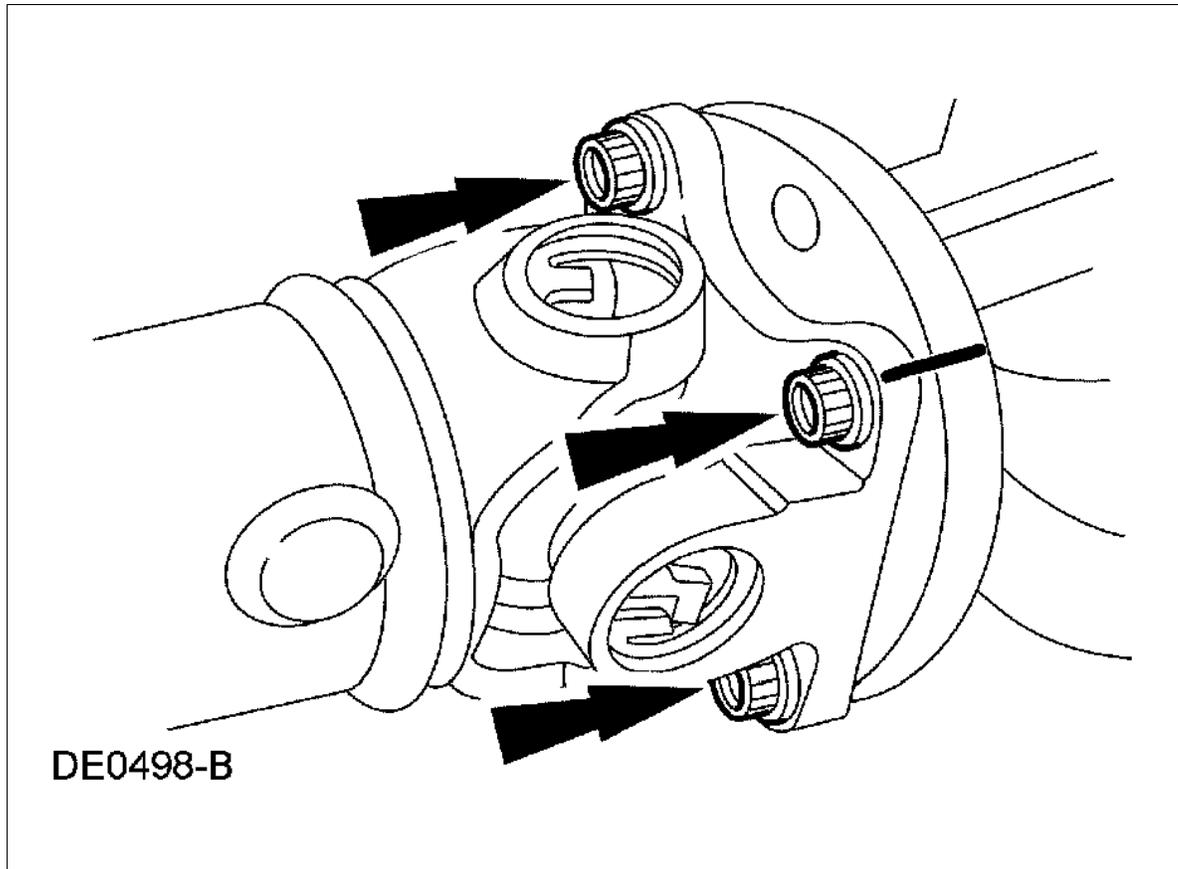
Identifying Index-Mark Driveshaft Flange And Pinion Flange
